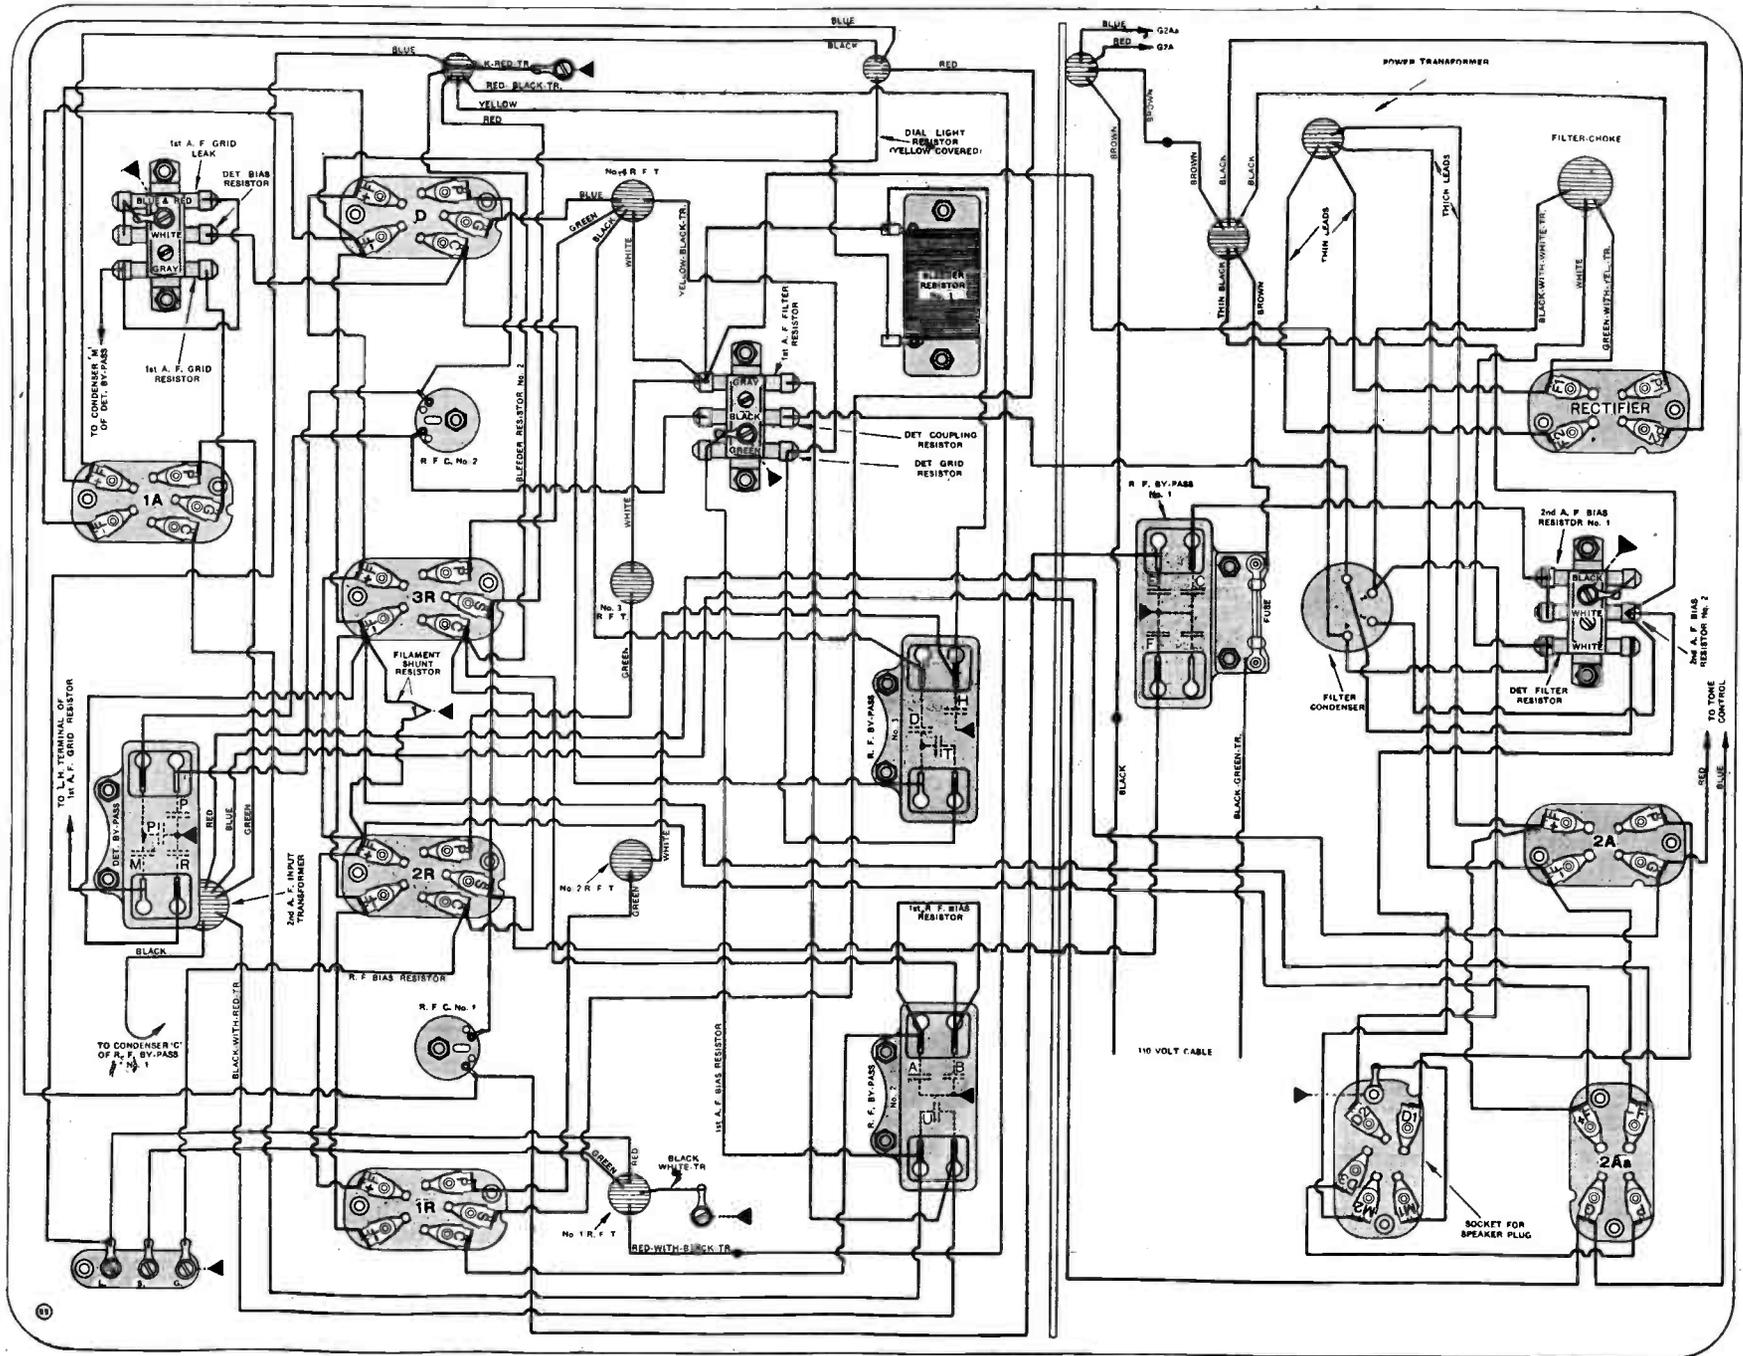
BOTTOM WIRING OF TYPE F CHASSIS RECEIVER
